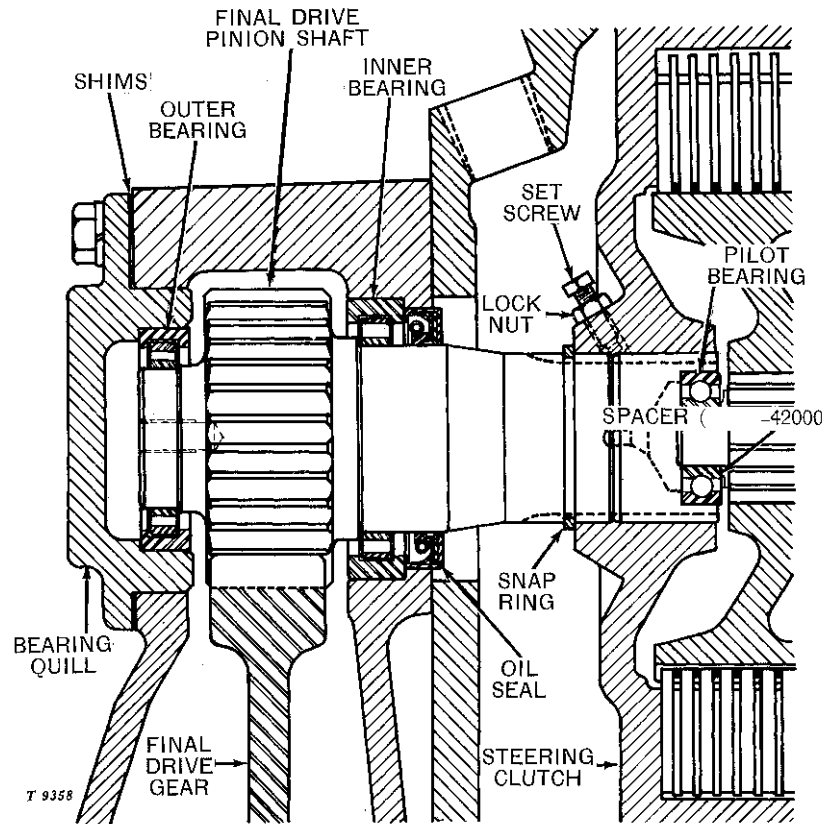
Final Drive and Pinion Shaft Installed
